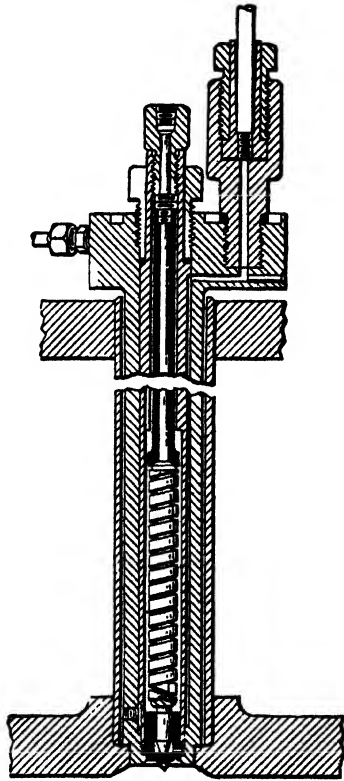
Section through Fulton spray valve, which consists, essentially, of a spring-loaded needle valve and a five-hole orifice.
